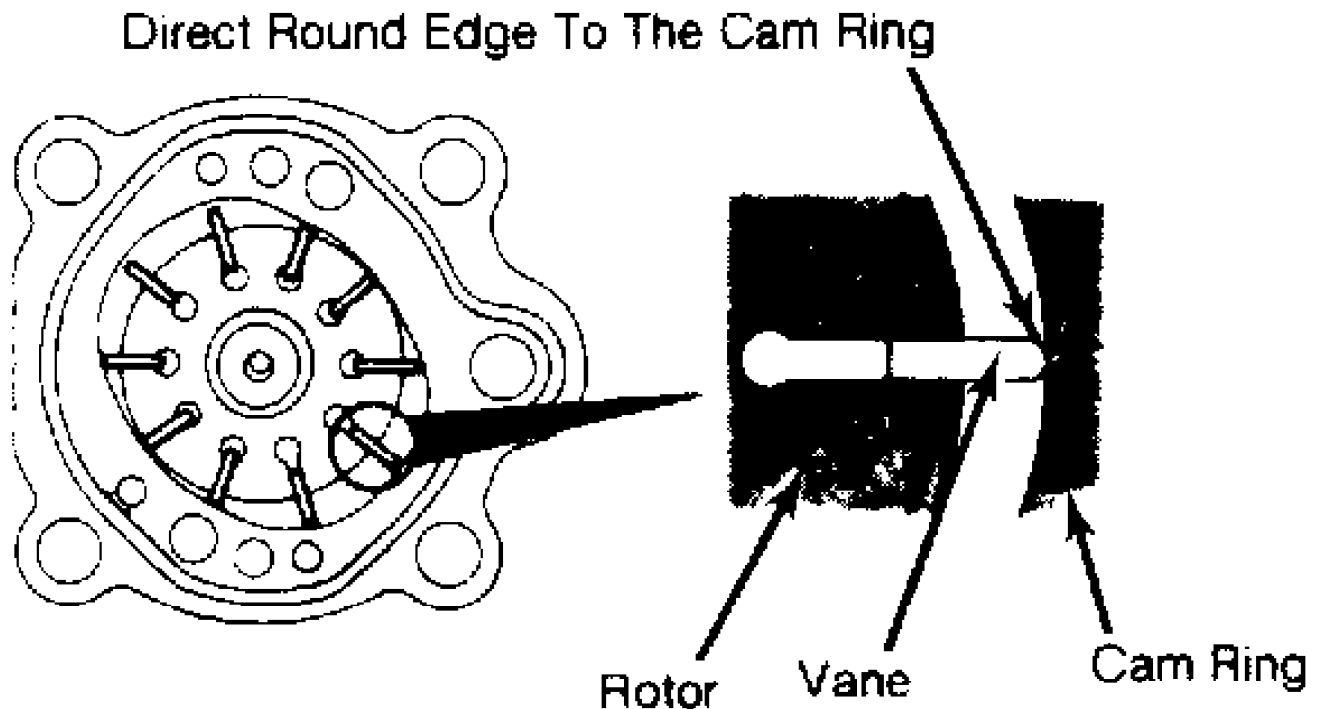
Installing Vanes Into Rotor Of Power Steering Pump
